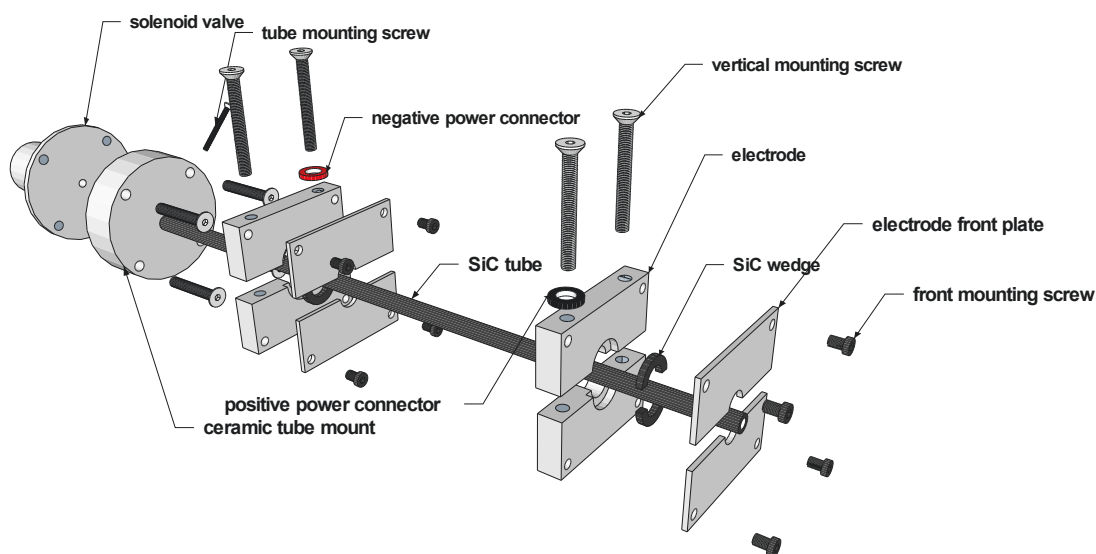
Exploded view drawing of a flash pyrolysis unit.
